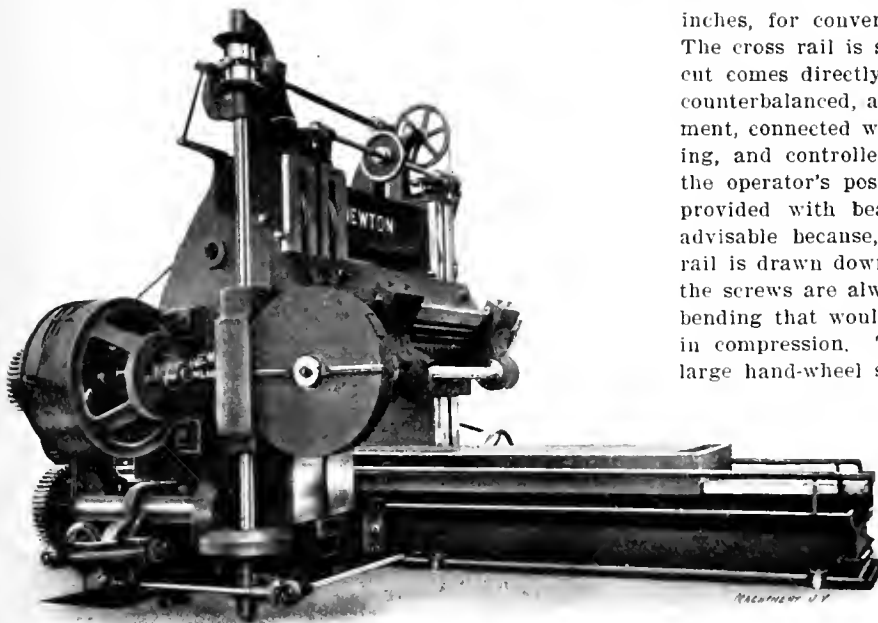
Newton Horizontal Milling Machine from Motor and Worm-drive Side.
